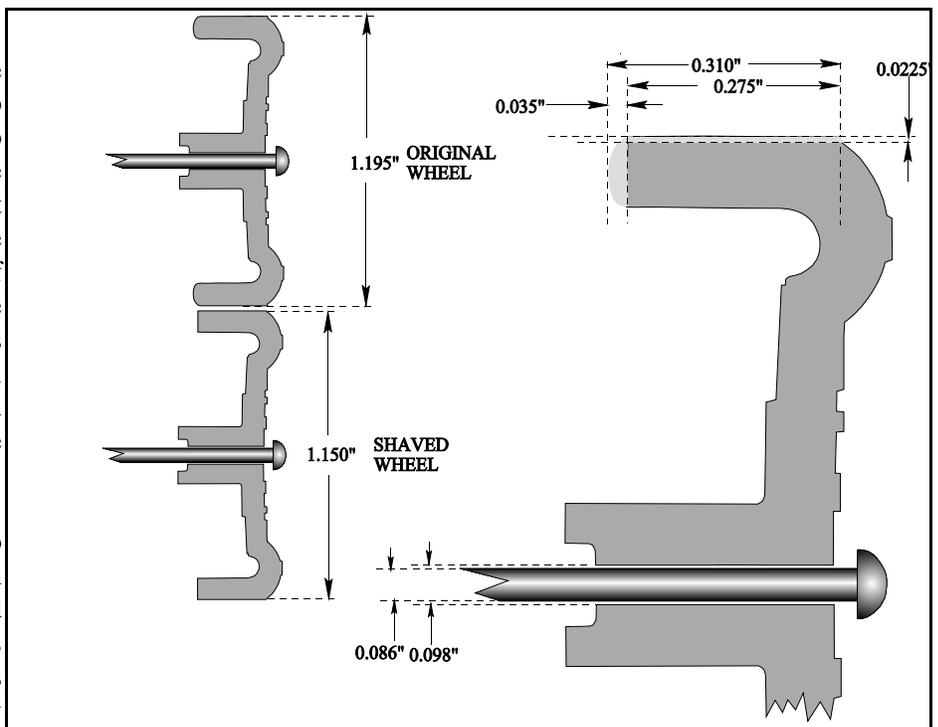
Cross section of a 1999 BSA wheel showing wheel/axle specifications.
